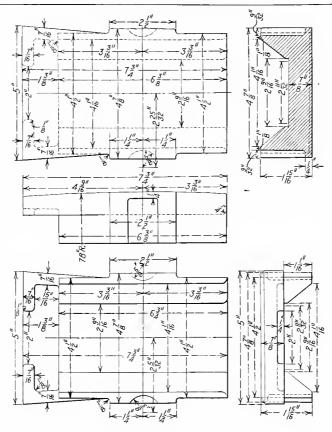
M. C. B. Standard Wedge for 41/4 in. by 8 in. Journal. (M. C. B. Sheet 6.)
